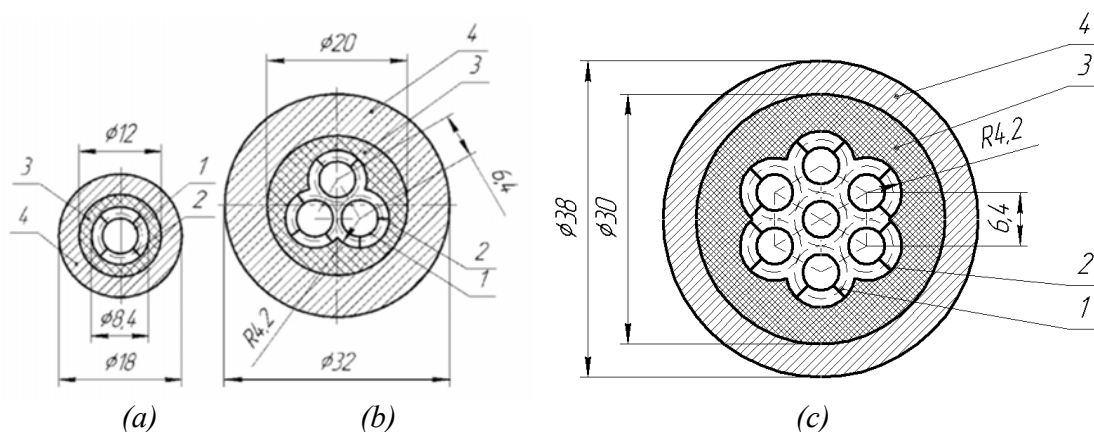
Cross section of test sections: 1 – heated rod (rod); 2 – distancing rib; 3 – shaped dielectric displacer; 4 – pressure tube.
